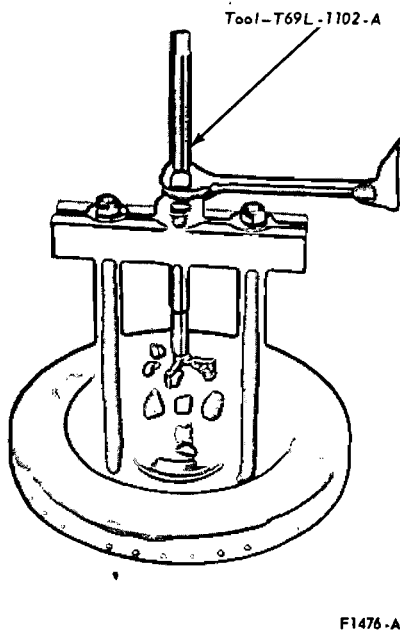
Removing Front Wheel Bearing Cups—Disc (Drum-Type Similar)
